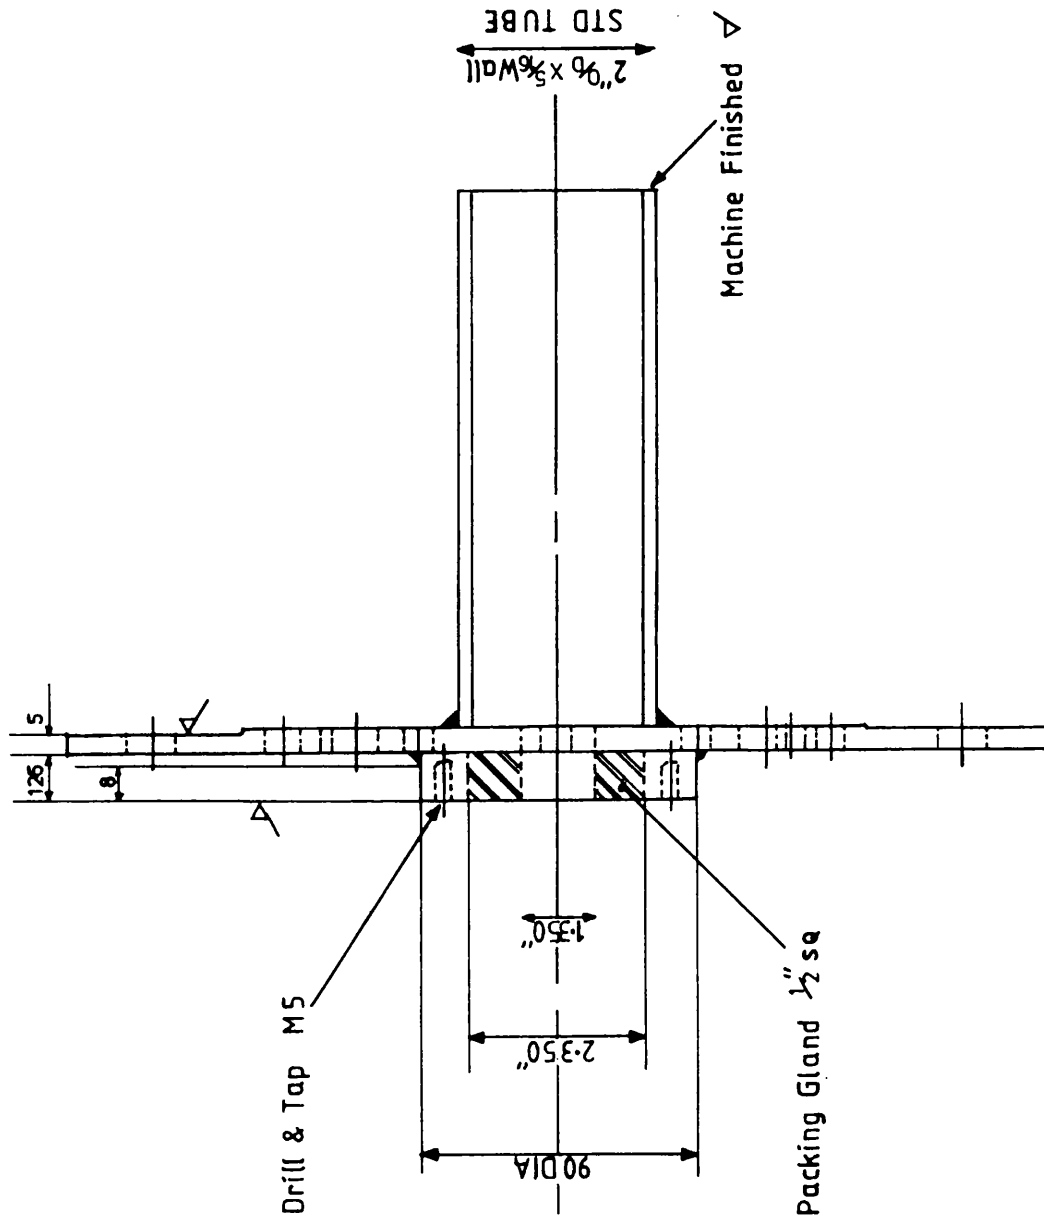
(a) Combustion tube production end and pressure jacket bottom flange
